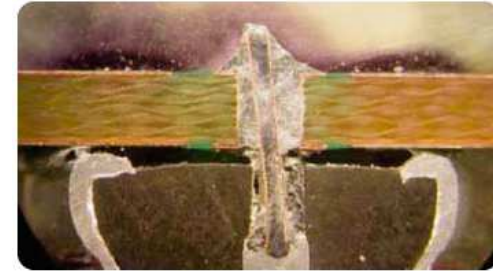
No fatigue cracks can be seen in the heel fillet of the joint at higher magnifications
